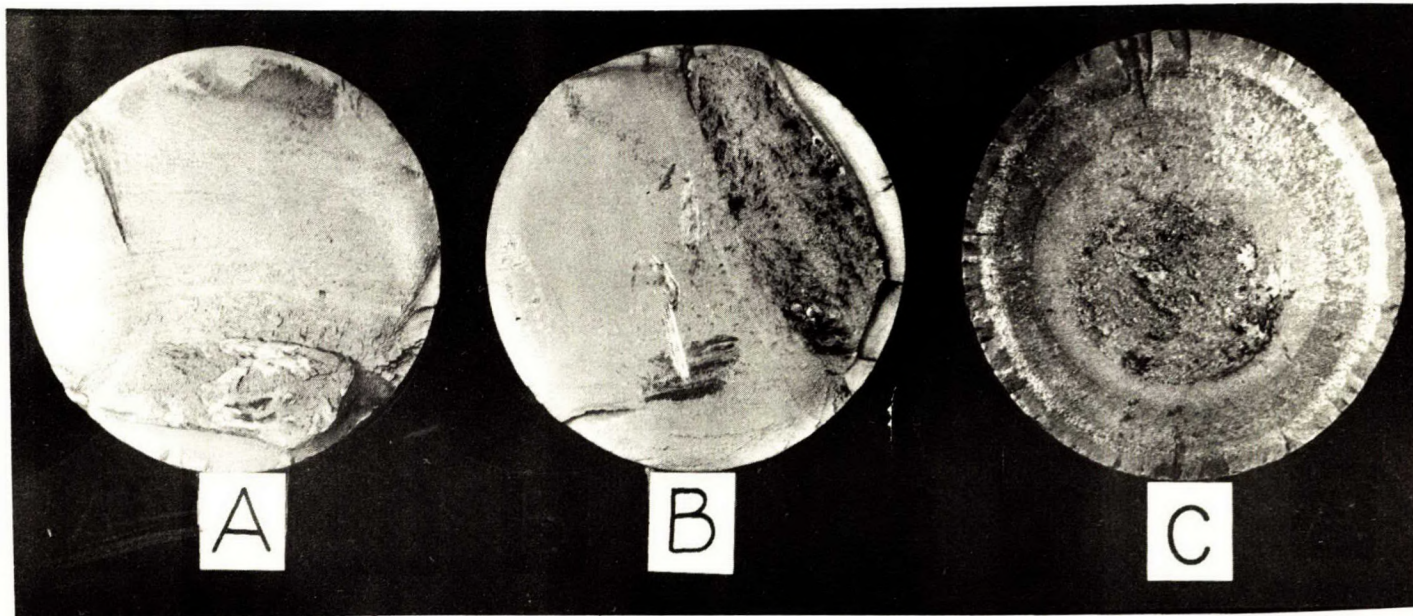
Fracture surfaces of the three axles, as received.
